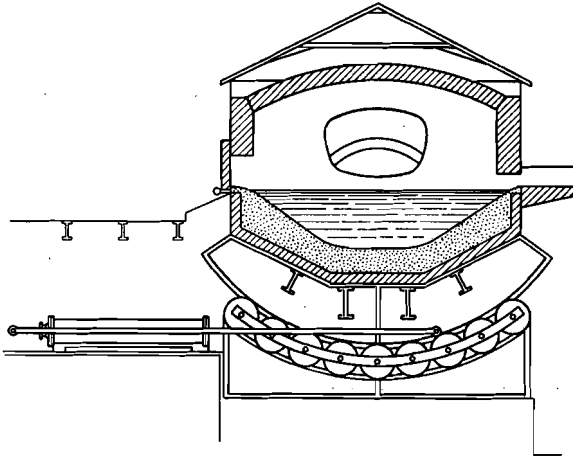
Campbell's tilting open-hearth furnace, showing hydraulic cylinder and mechanism for tilting, 1889.
